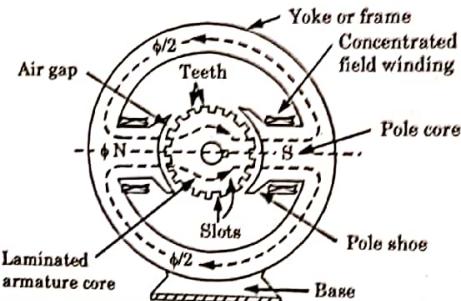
Constructional features of a 2-pole DC machine.
